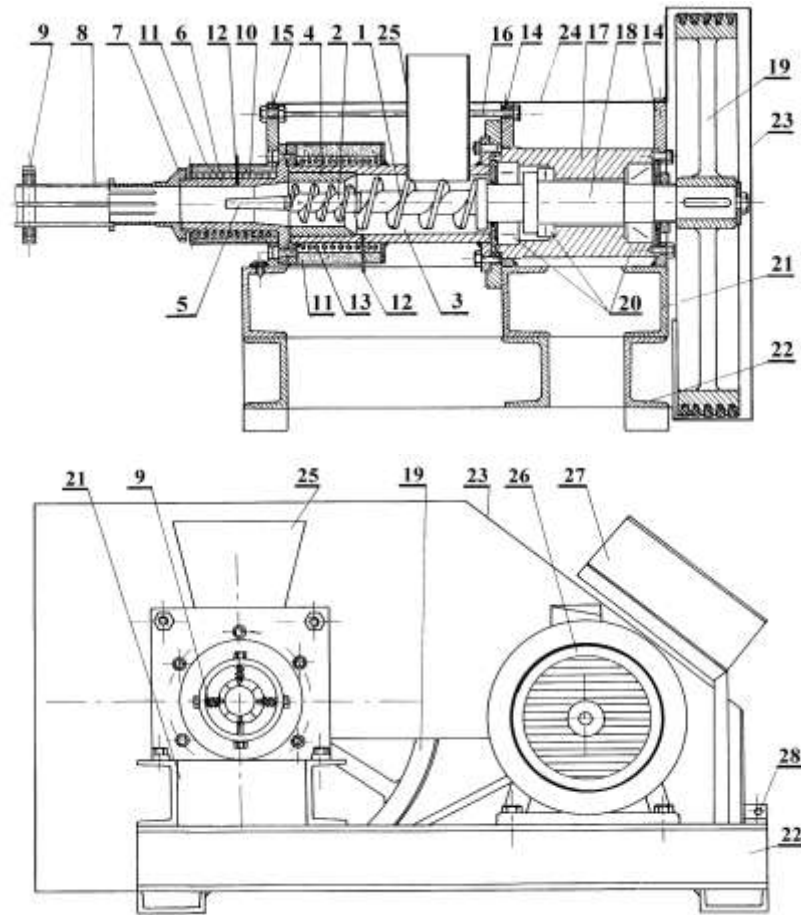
A prototype of the HD-3 screw briquette machine [2,5]: 1- feeding screw, 2- densifying screw, 3- working chamber, 4- , 5- forming pin, 6- forming matrix, 7- transitional matrix, 8- briquette leads, 9- regulation of lead press, 10- heating element of the forming matrix element, 11- thermal insulation, 12- temperature sensor, 13- heating element of choke sleeve, 14- fixing plate, 15- setting plate, 16- setting pin, 17- main body, 18- crankshaft, 19- transmission wheel, 20- bearings, 21- fixing frame, 22- base, 23- gear jacket, 24- working system jacket, 25- charge, 26- electric motor, 27- control board, 28- jacket hinge
